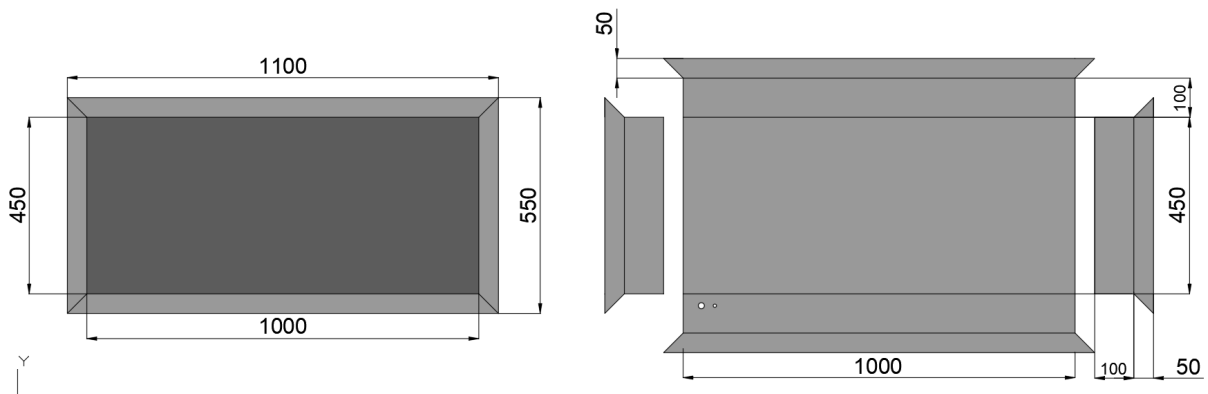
Dimensions of the Test Stand in mm as seen from above (left) and the steel plates prior to being welded together (right).
